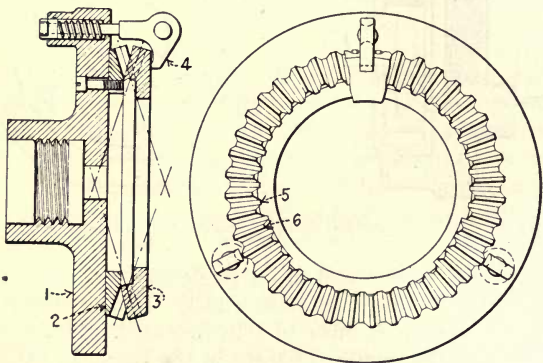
Heald chuck for locating large bevel gears for internal grinding.
